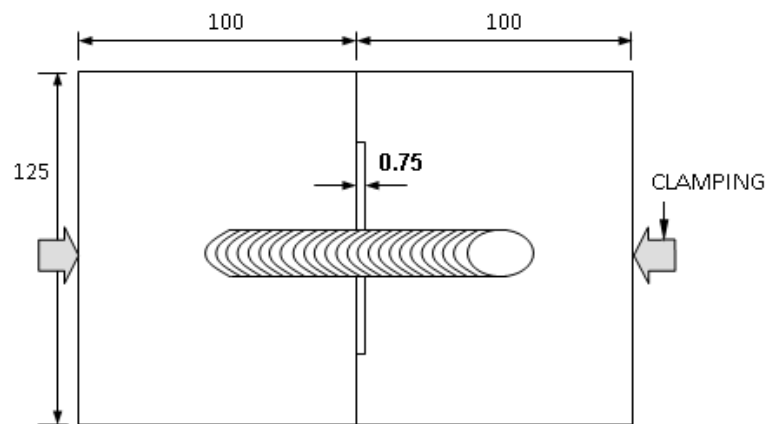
A typical G-BOP configuration used to test for weld metal hydrogen assisted cold cracking. In this image, a weld is deposited over a 0.75mm gap which acts as a large stress concentration, assisting initiation of transverse weld metal (Pitrun, 2004).
